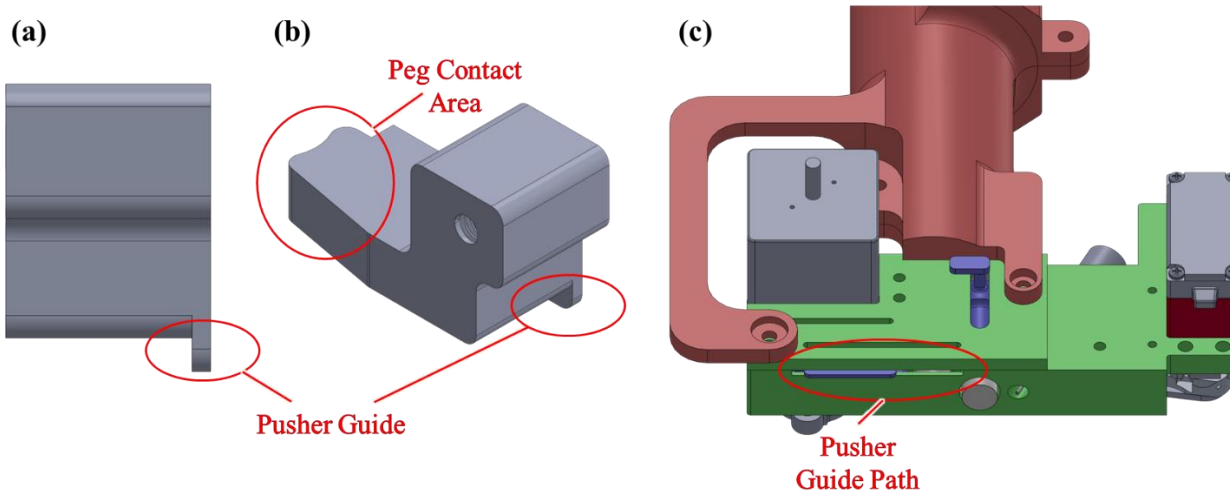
Components of the peg insertion tool. (a) Rear view of the pusher. (b) Isometric view of the pusher. (c) Combined assembly of the pusher, highlighting its positioning on the peg insertion tool.
